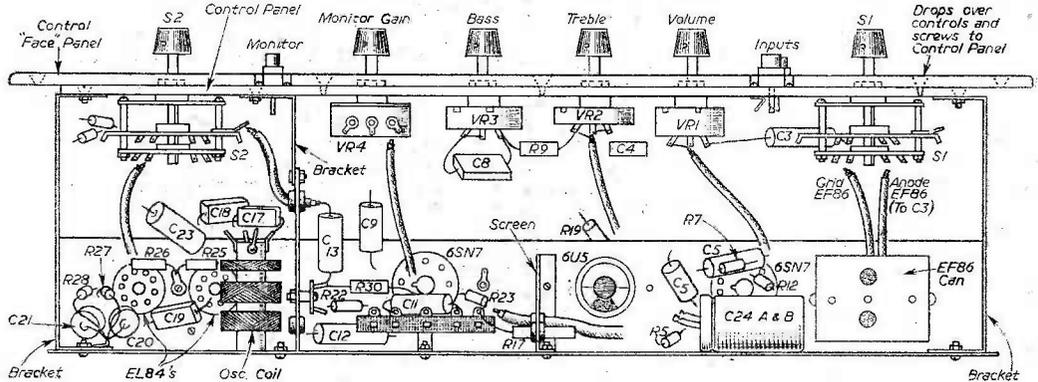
Front view of chassis, showing general layout of components and controls.
